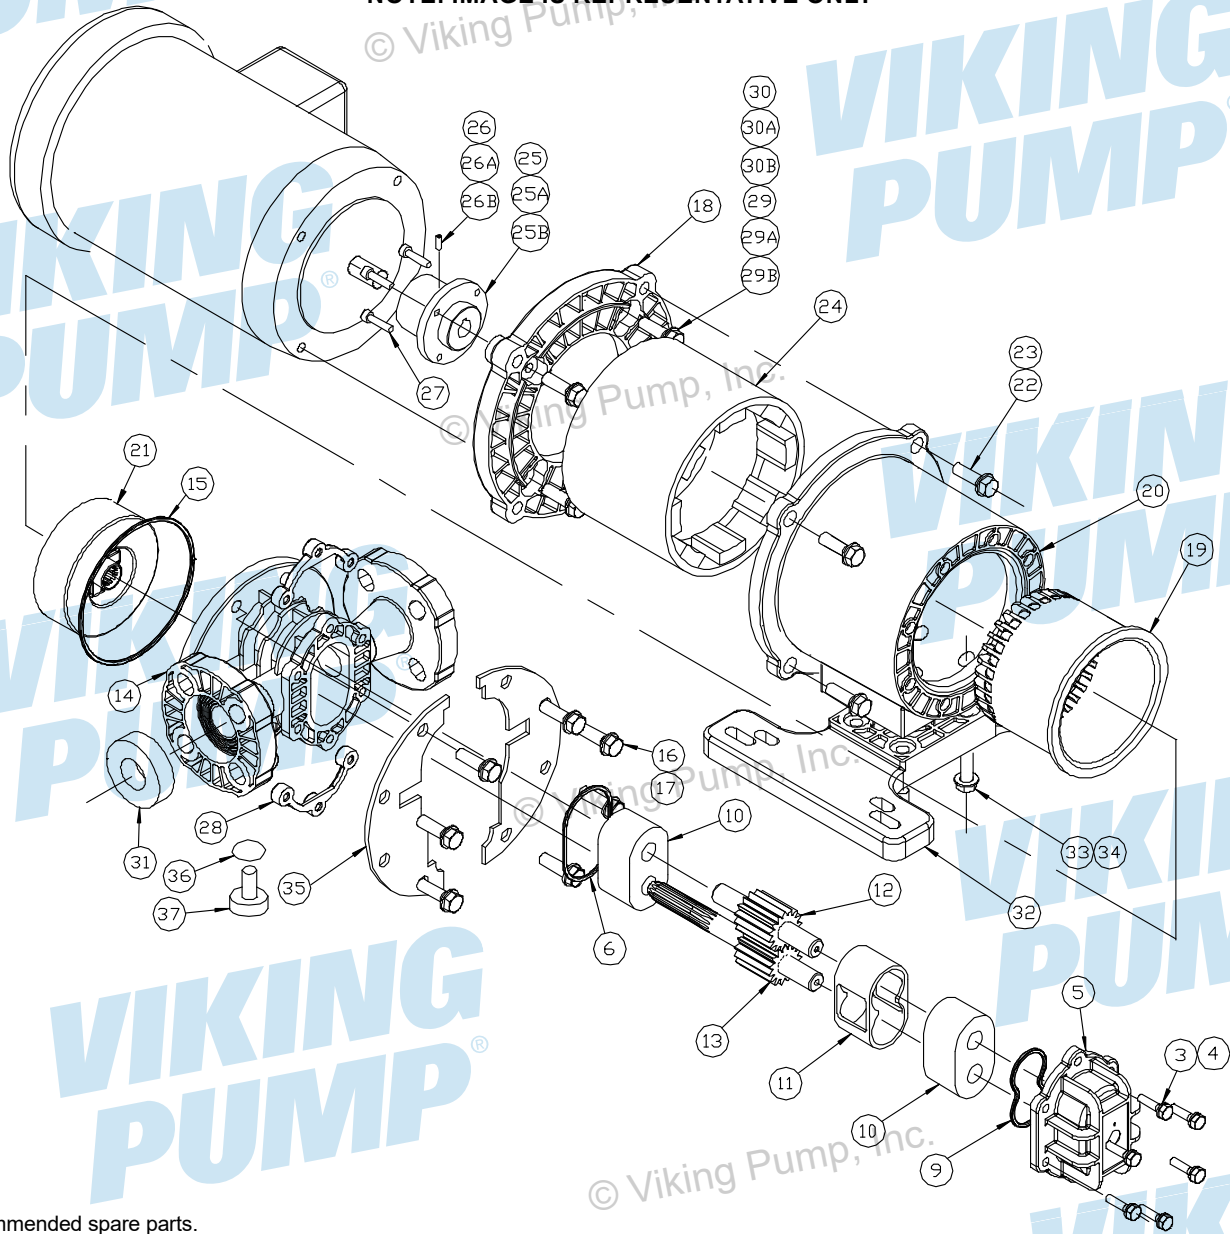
EXPLODED VIEW E25 PUMP (TYPICAL)
